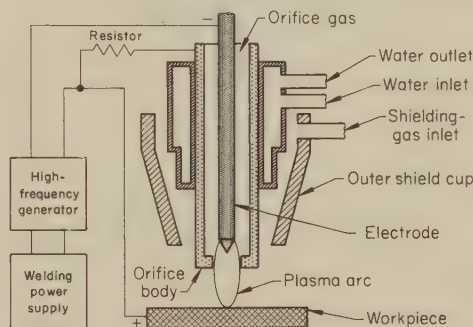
Schematic diagram of a high-current plasma-arc welding system, using a transferred arc
